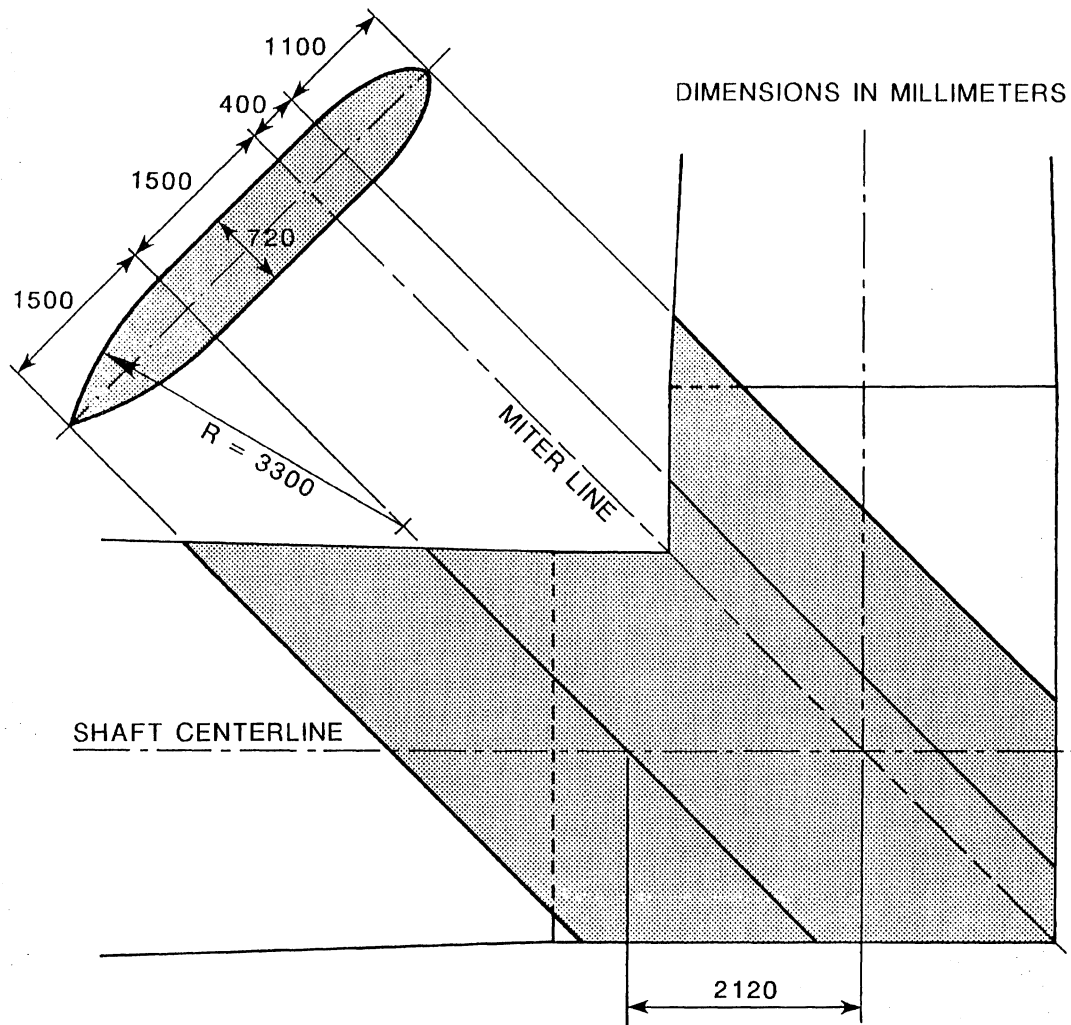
Elbow No. 2 pump shaft fairing, inclined.
